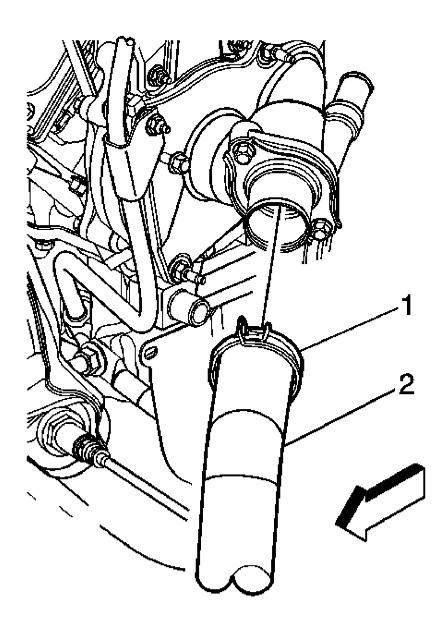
Identifying Radiator Outlet Hose Courtesy of GENERAL MOTORS CORP.
